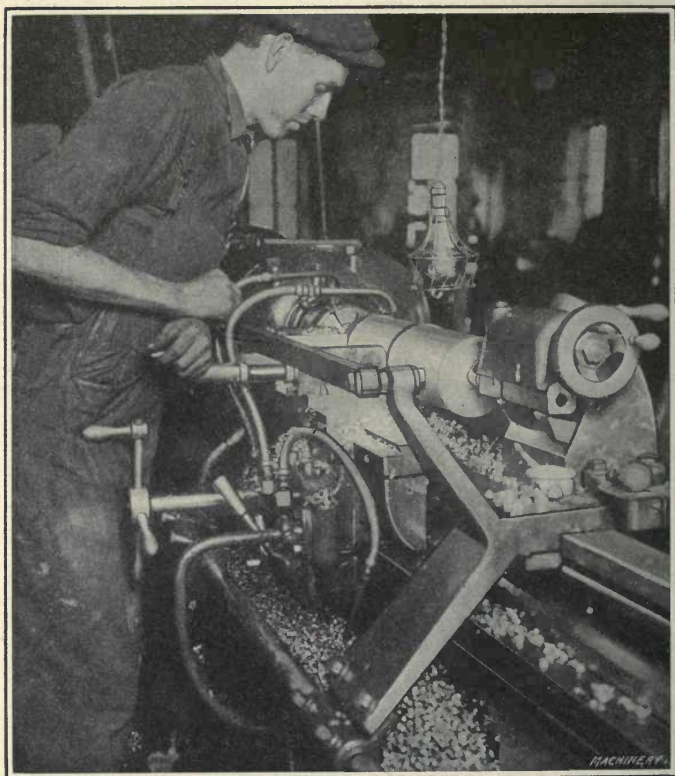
Rough-turning External Diameter In a “Lo-swing” Lathe
